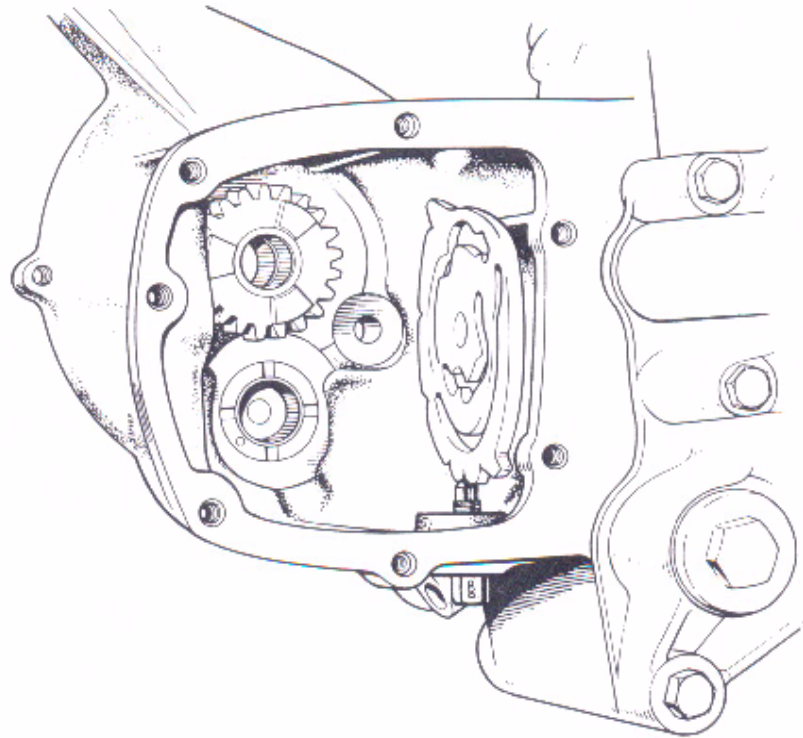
Reassembling the transmission (gearbox). Illustration indicates camplate in the neutral gear position
